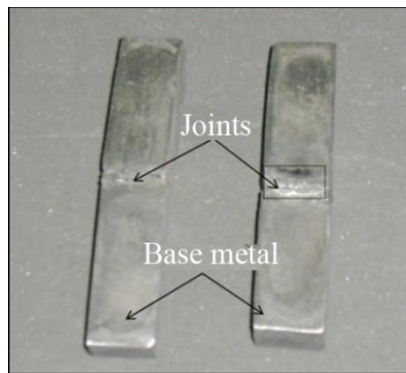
SS-316 welded specimens developed through MHH (Srinath et al., 2011)
